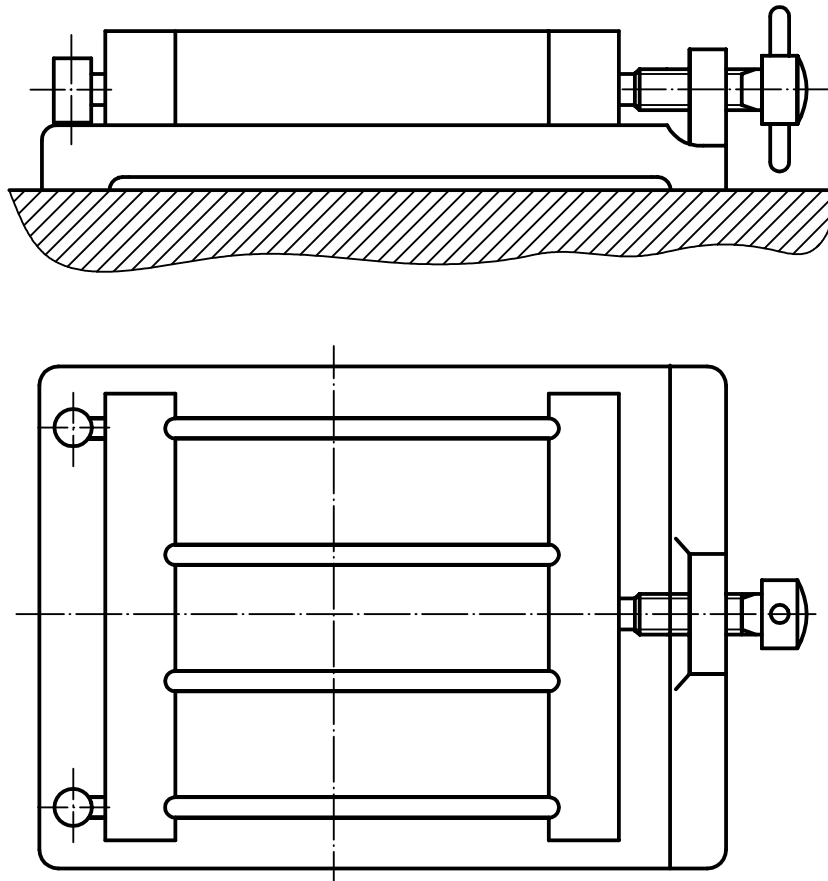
Typical mould for forming mortar prism specimens 160 mm × 40 mm × 40 mm
